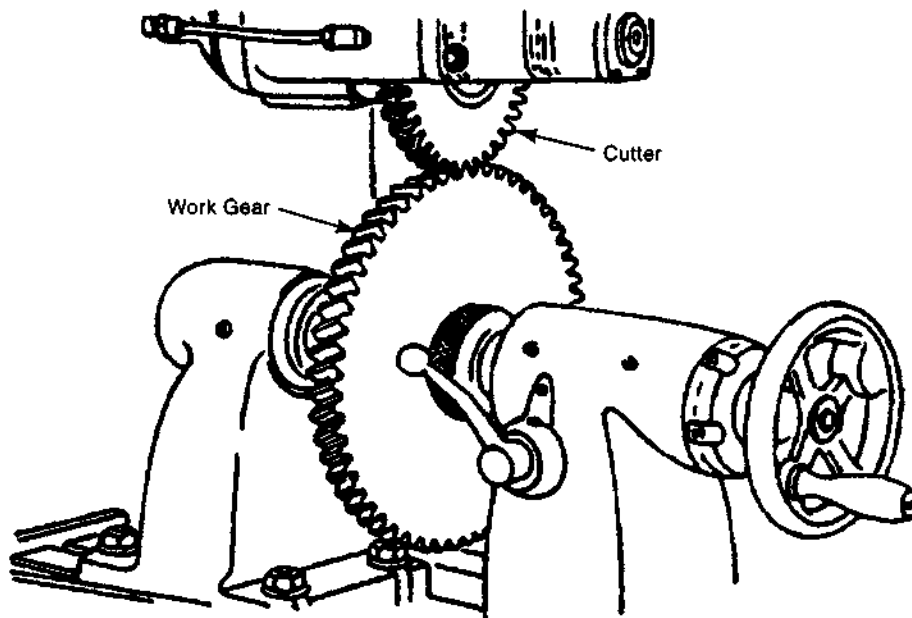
In the gear shaving operation, a gear-shaped cutter and the gear workpiece are run together. The cutter is shaped so that there is some sliding action as the two rotate. The action shaves a very small amount of metal from the gear surface, producing a higher quality involute gear tooth form. (Reprinted with permission of the Society of Manufacturing Engineers, *Tool and Manufacturing Engineering Handbook*, 4th ed., Vol. 1 Machining, copyright 1983.)
